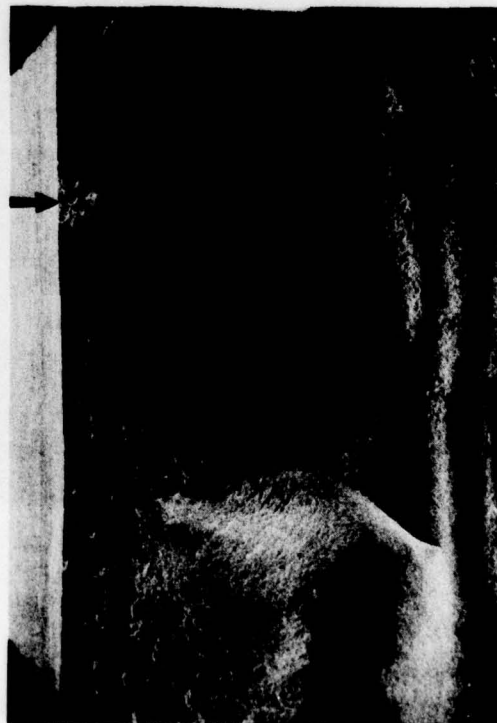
Fracture Surface of Ceralloy 147A HPSN Specimen No. 2 Showing Ultrasonically Detected Defect at Fracture Origin.
